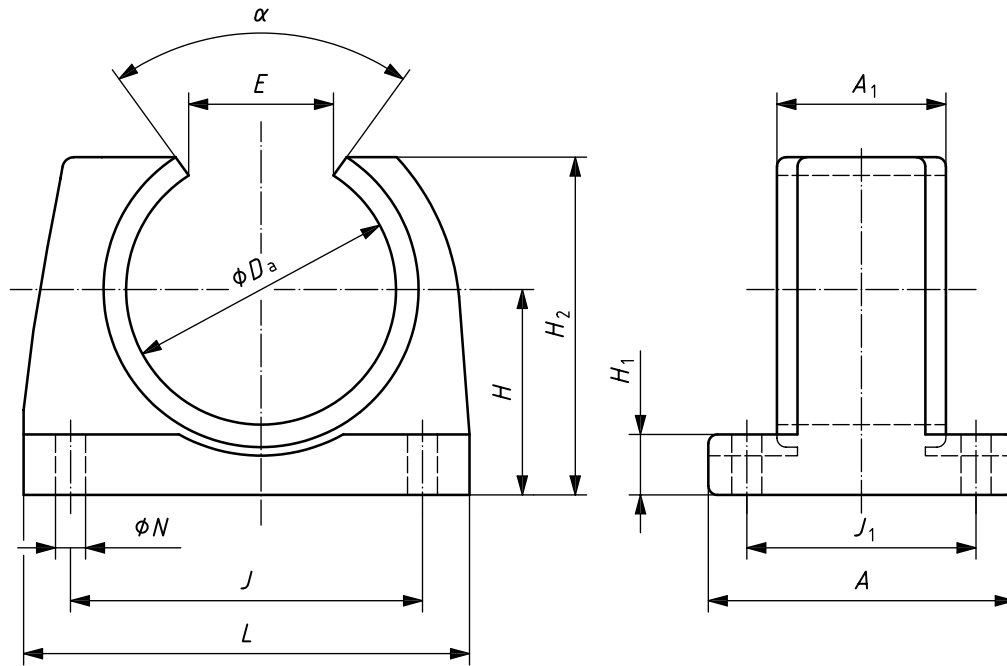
Open flanged housings for series 3 sleeve type linear ball bearings
